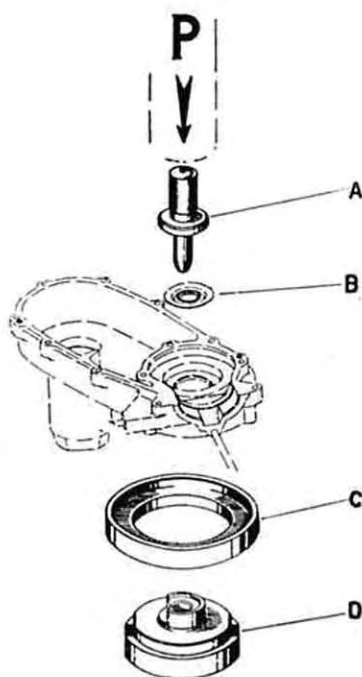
Assembling the Oil Seal on the Crankcase.
